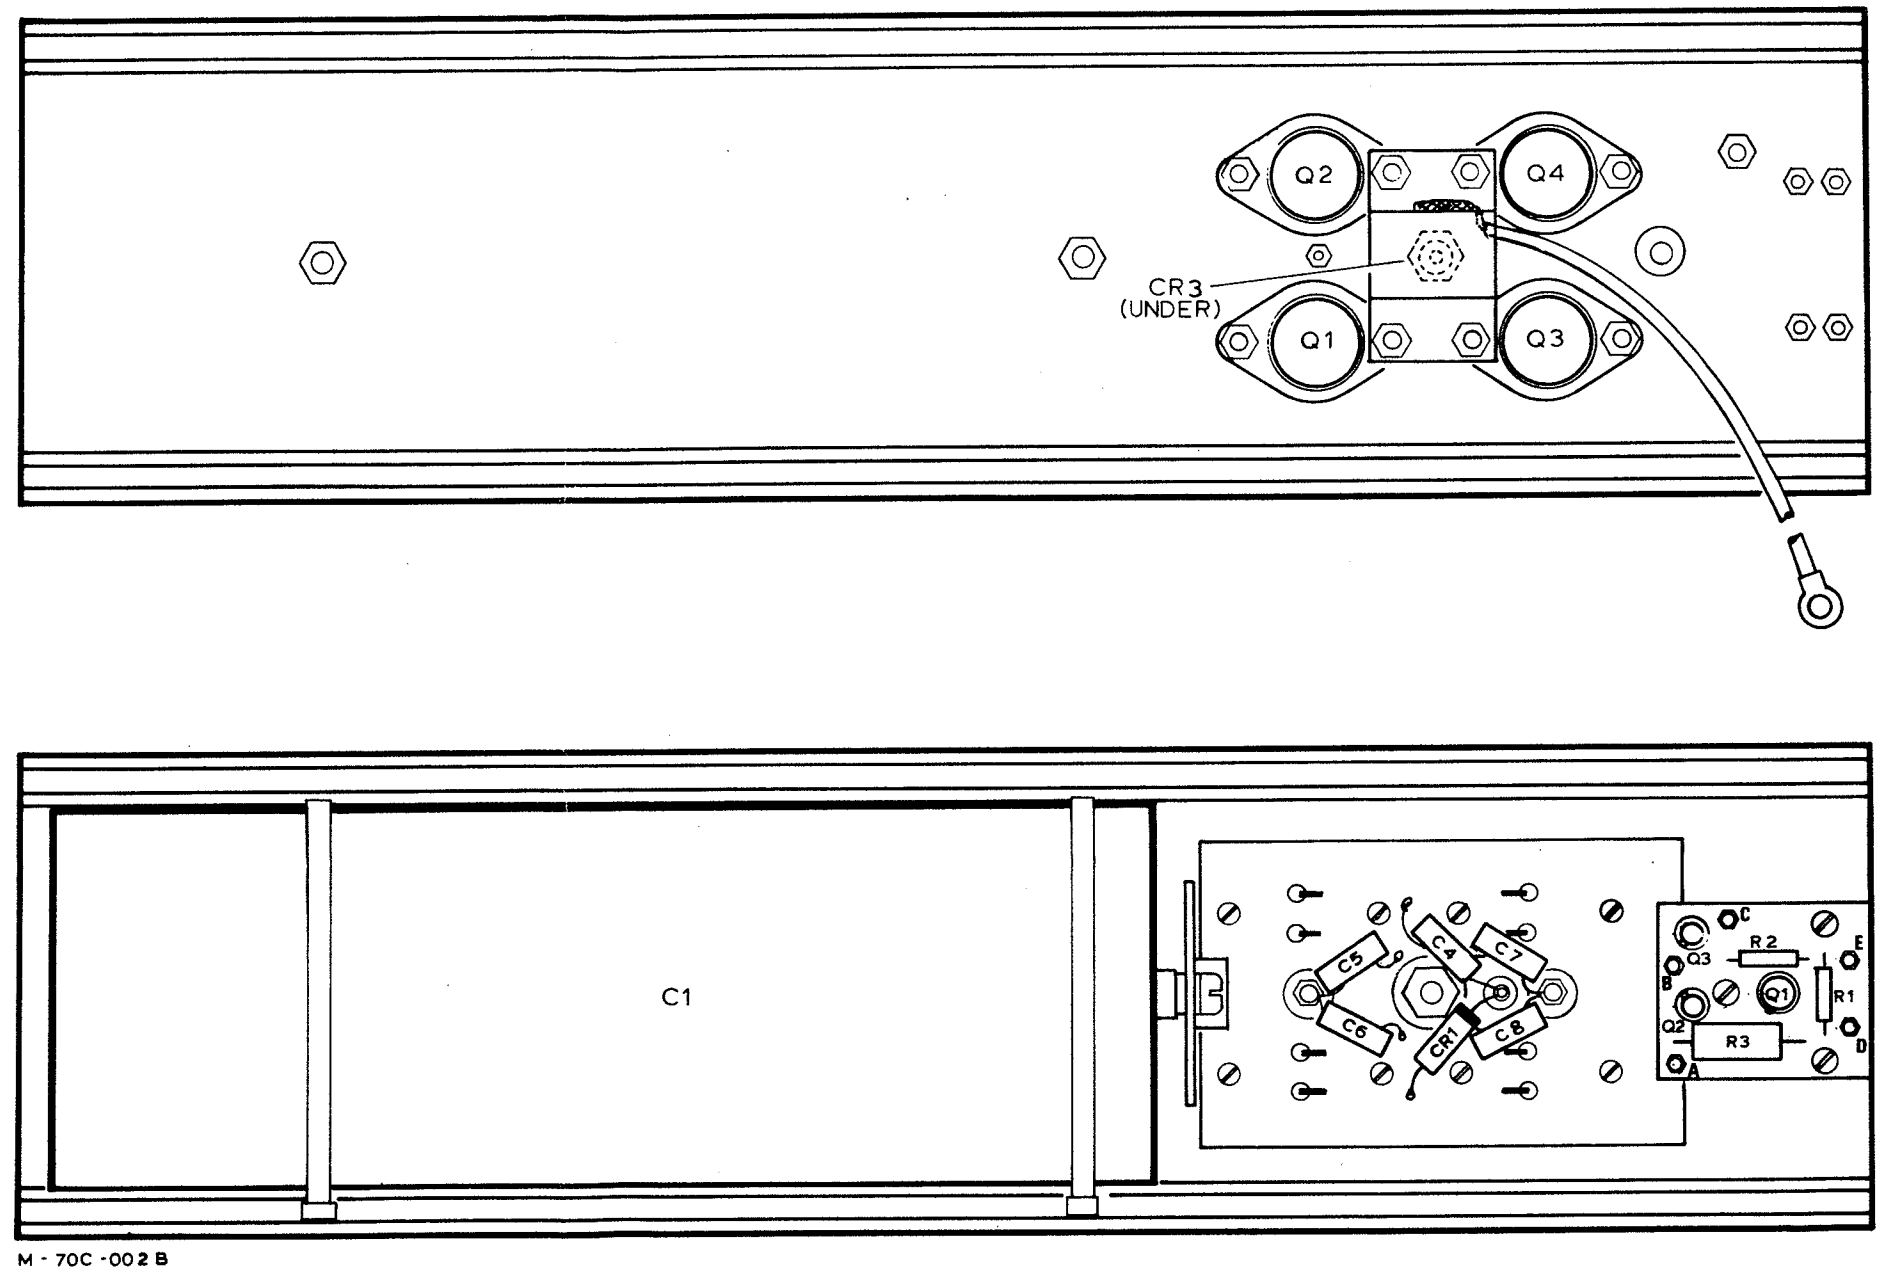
Assembly Detail - Switched Regulator Extrusion (A1/A2)
